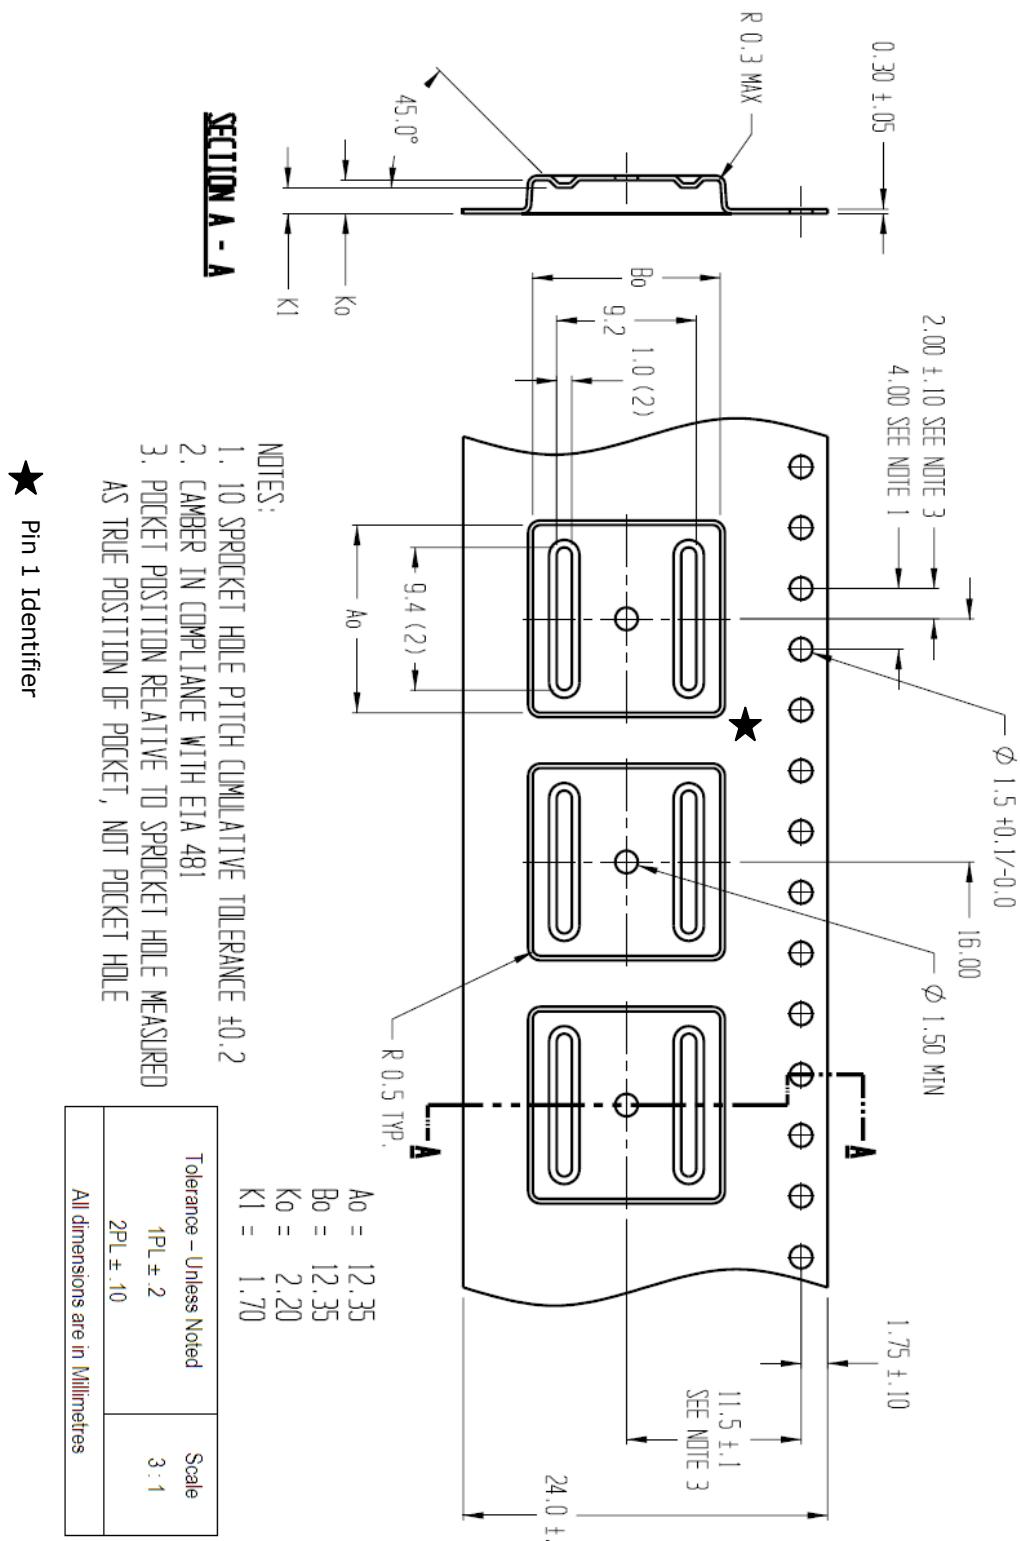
FT2232HL and FT4232HL Tape Dimensions
